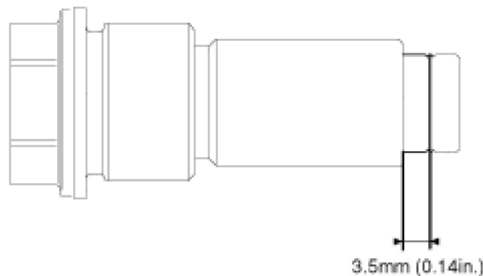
Identifying Distance Between Cylinder Head Surface & End Of Tensioner Plunger (2 Of 2)
